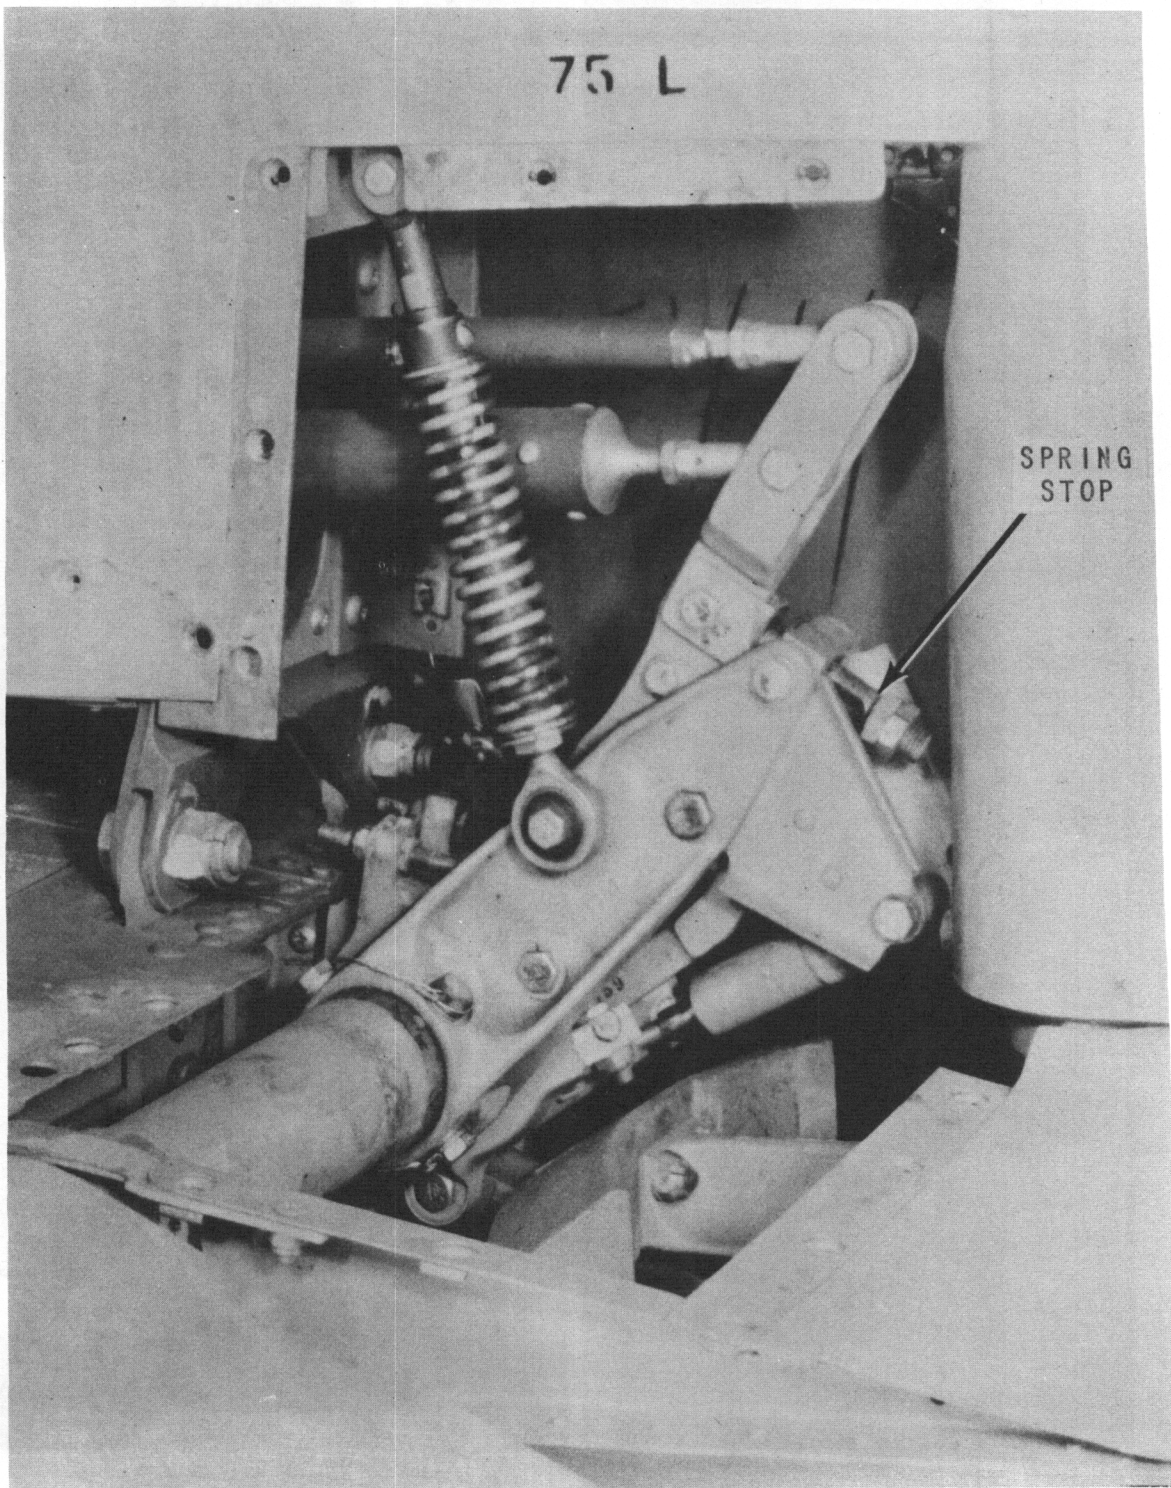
ELEVATOR SPRING TAB MECHANISM UNLOCKED
